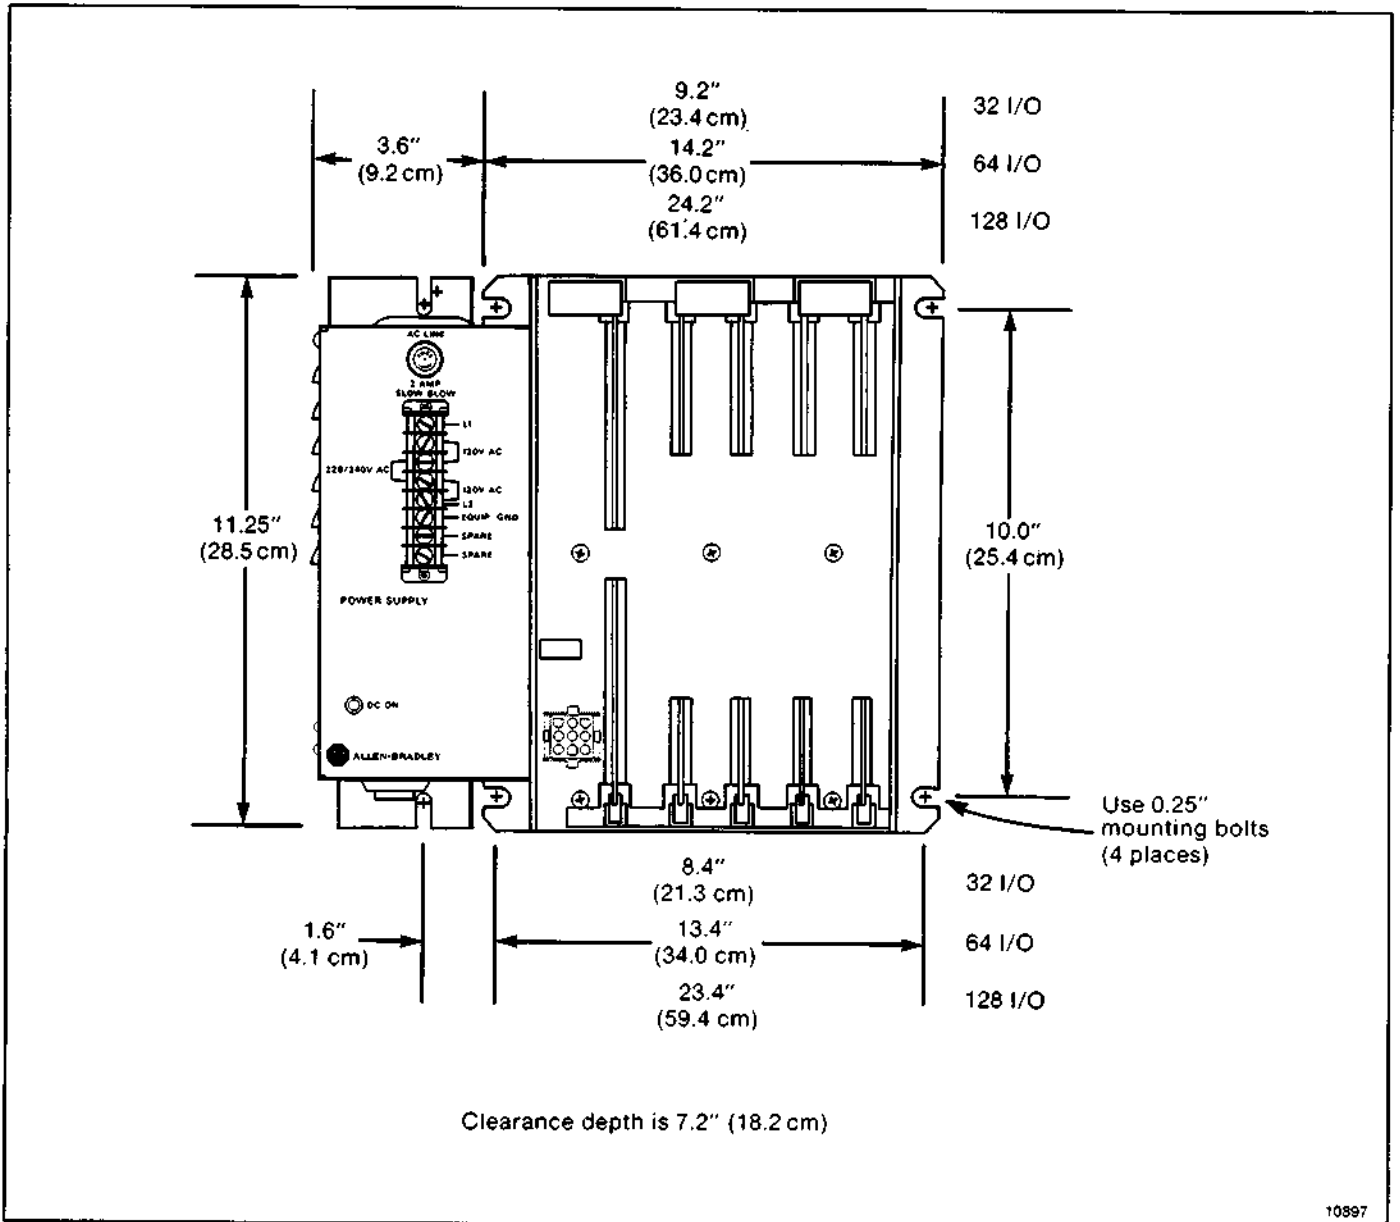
1771 I/O Chassis and 1771-P2 Power Supply Dimensions
